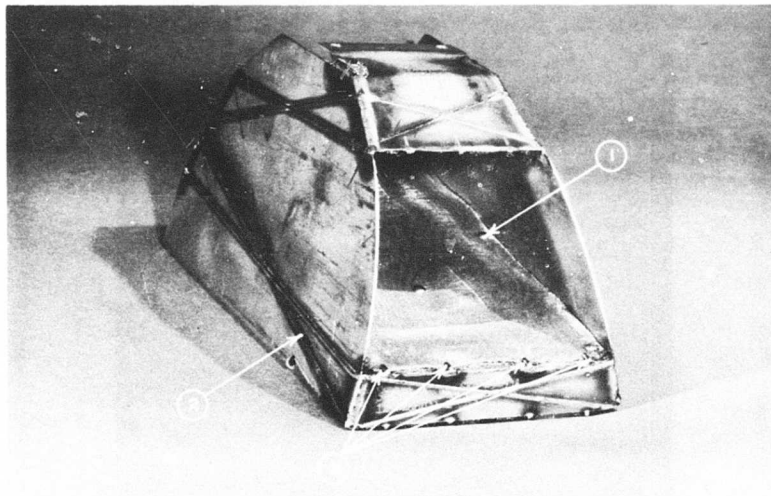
Hot Side of the Inner Matrix Package: (1) Rivets Holding Screens Together, (2) Welds Holding Screen Packs in Position, (3) Fingers Preventing Lifting of Screen Ends Into Airstream.
